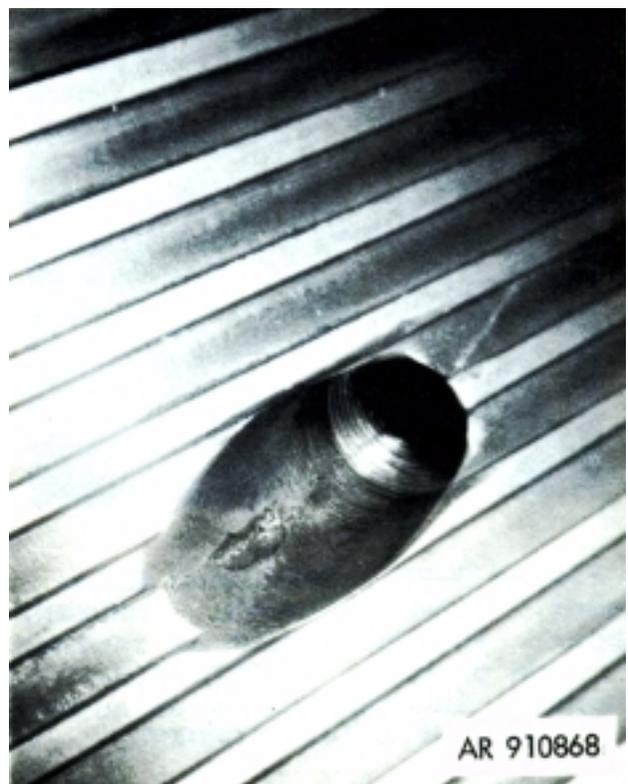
Evacuator hole: Internal crack on feather edge. Possible external crack.
